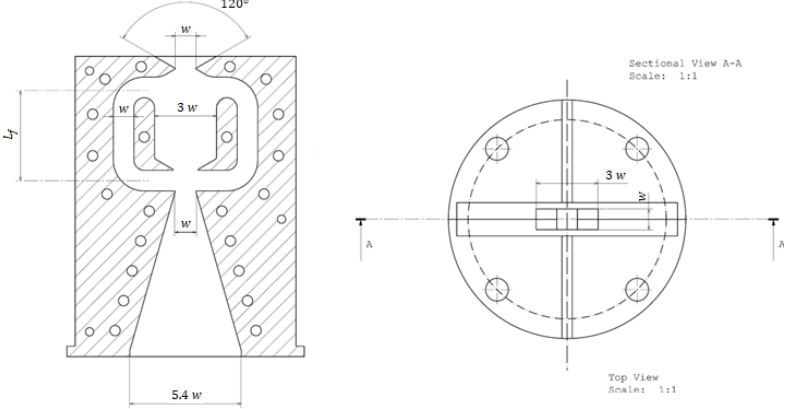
Draft of the fluidic oscillator, front view and top view.
